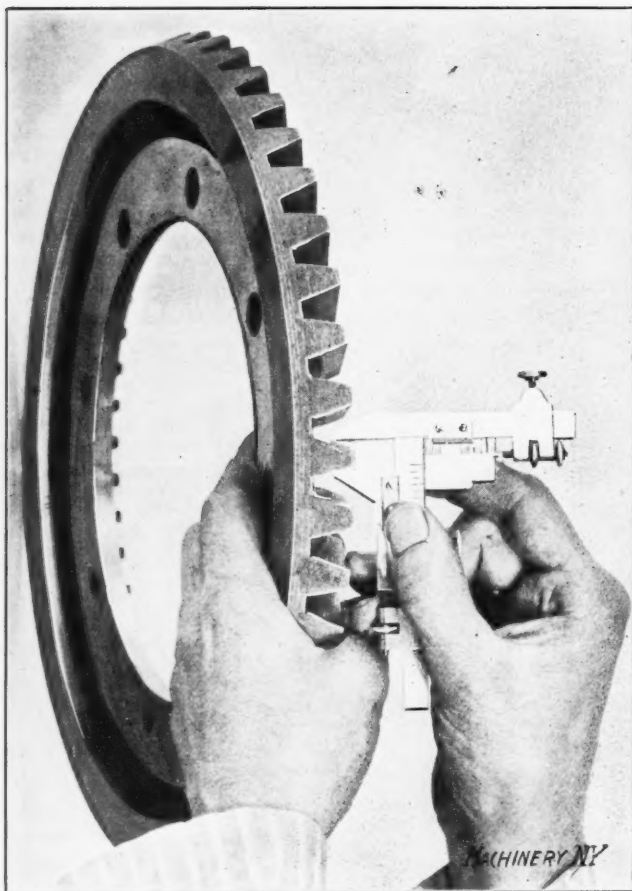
Brown & Sharpe Gear-tooth Caliper in Use
